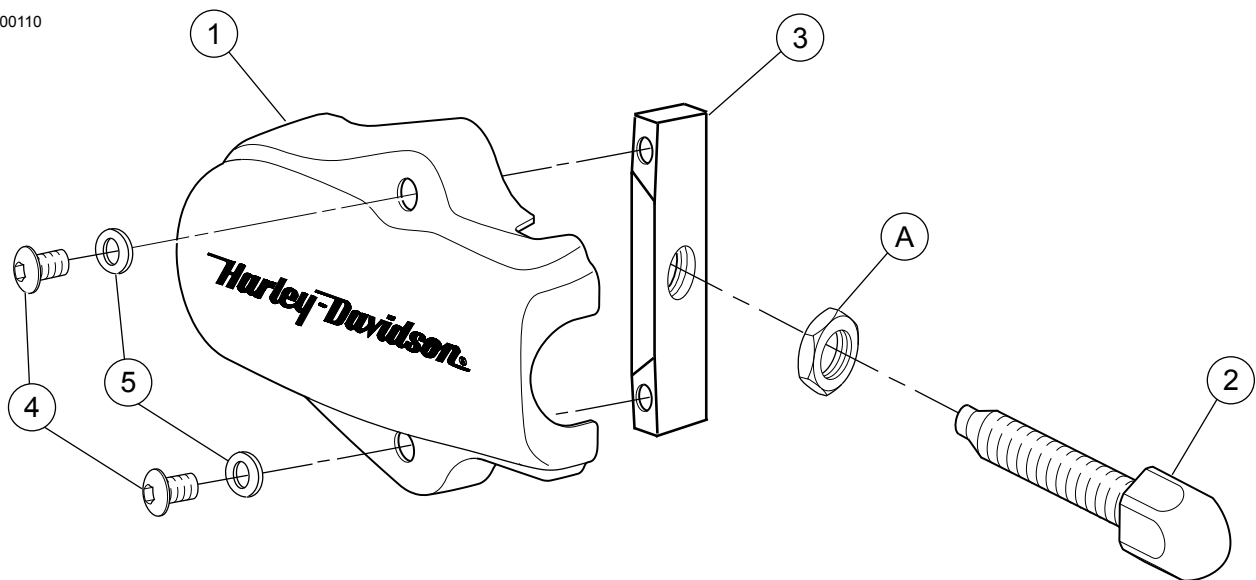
Service Parts: Softail Rear Axle Nut Cover Kit (Bullet Style)
